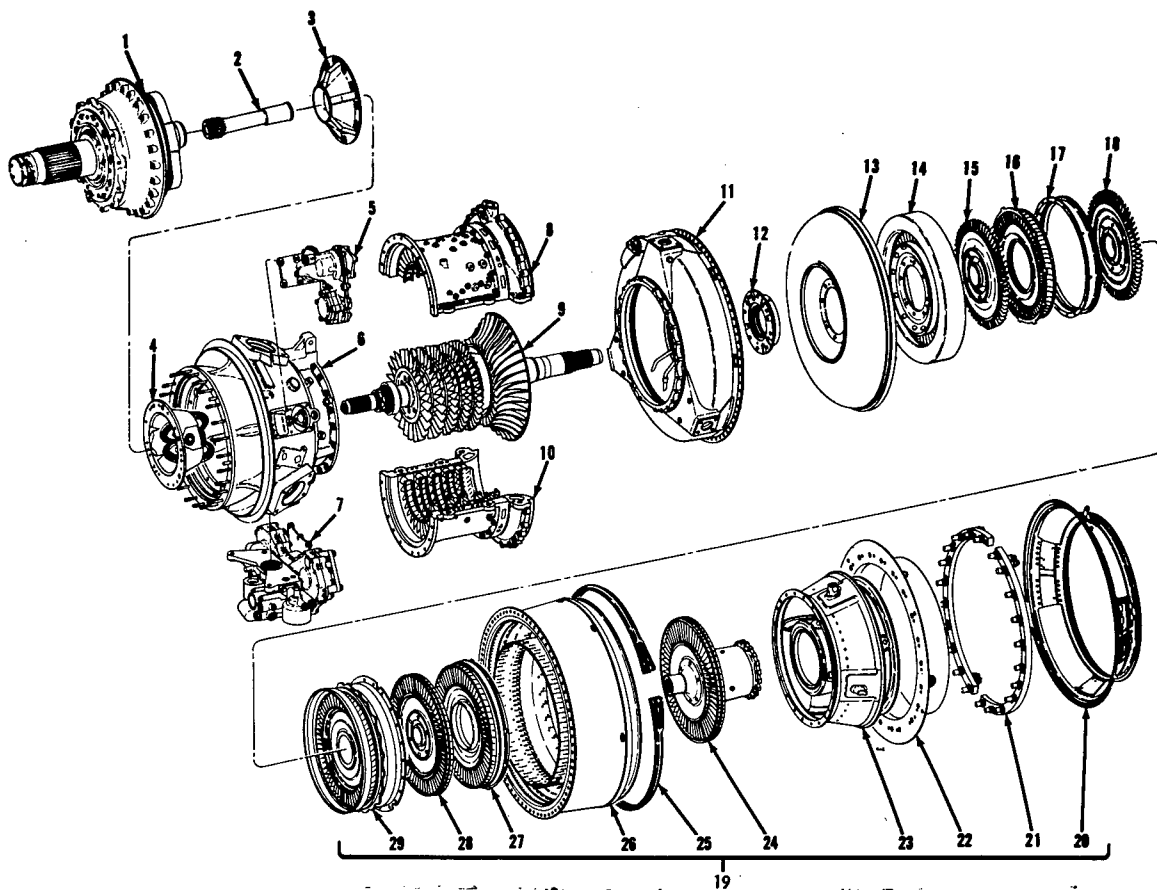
Engine Major Assemblies (T53-L-15)
